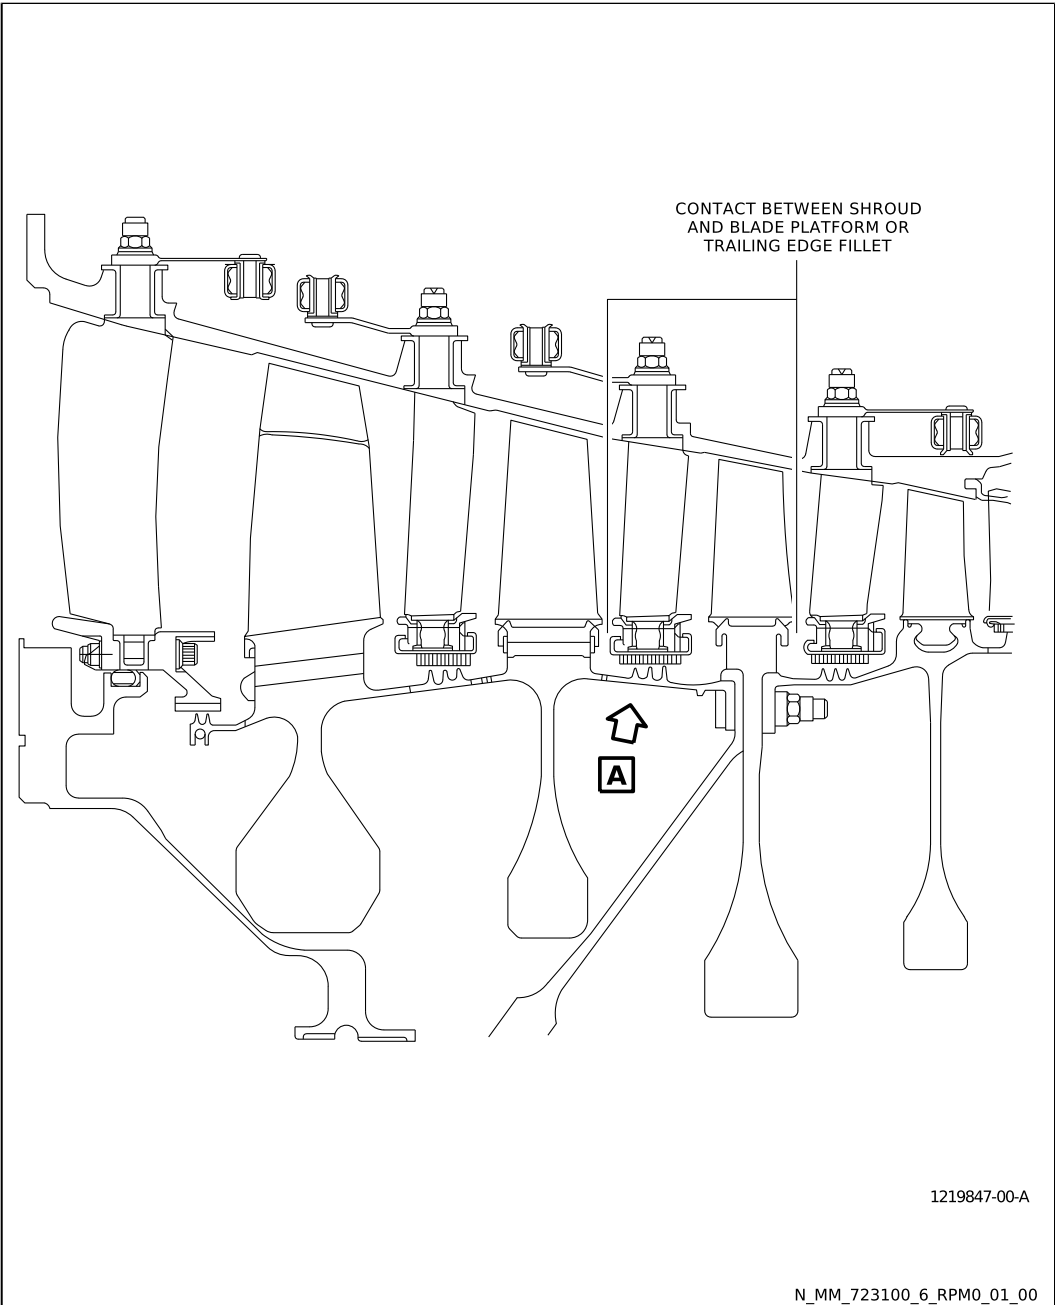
A (SHEET 1/2) - Stator Vane ID to Rotor Contact
